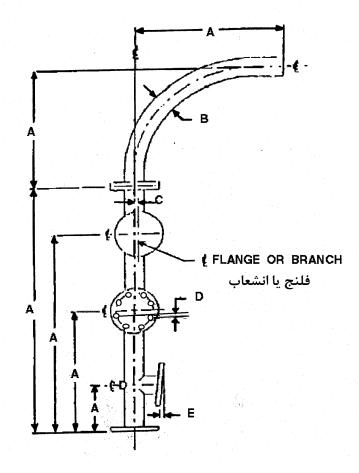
DIMENSIONAL TOLERANCES FOR FABRICATED PIPEWORK
